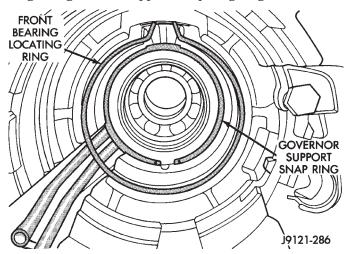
Front Bearing Locating Ring And Governor Support Snap Ring Location
